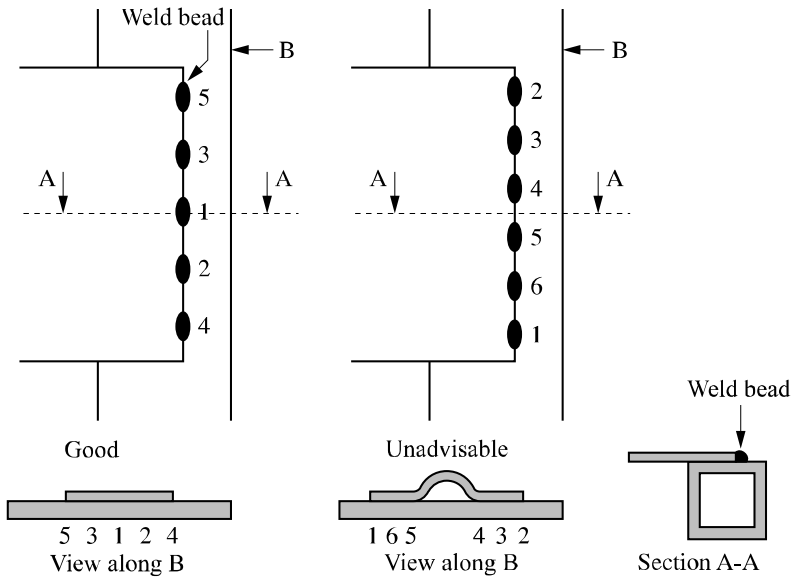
Short run welding of a floor sheet on a rigid framework
